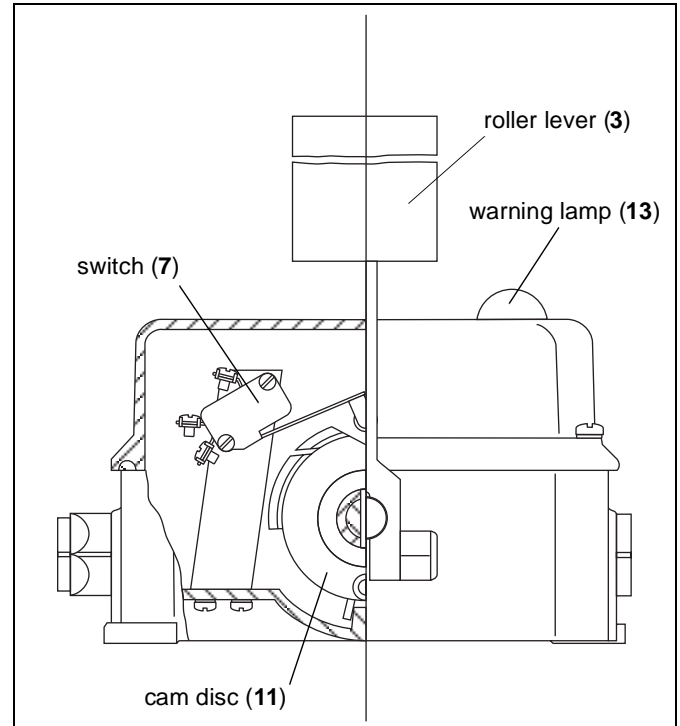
Conveyor belt misalignment switch of the type HES
